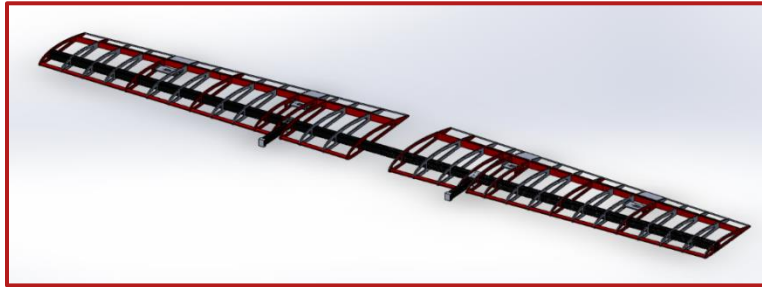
Image of Full Wing Assembly
